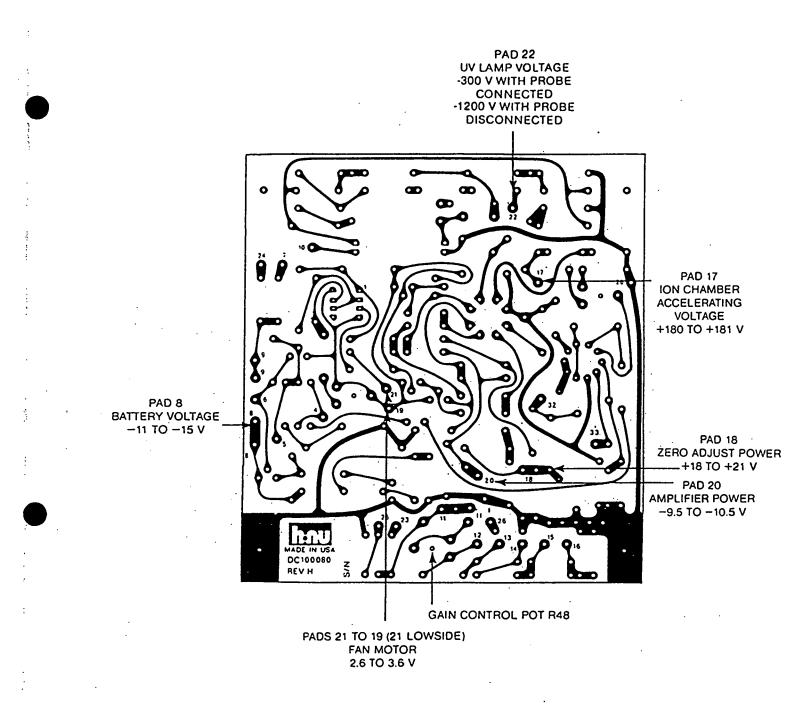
PAD LOCATION, POWER SUPPLY PCB
